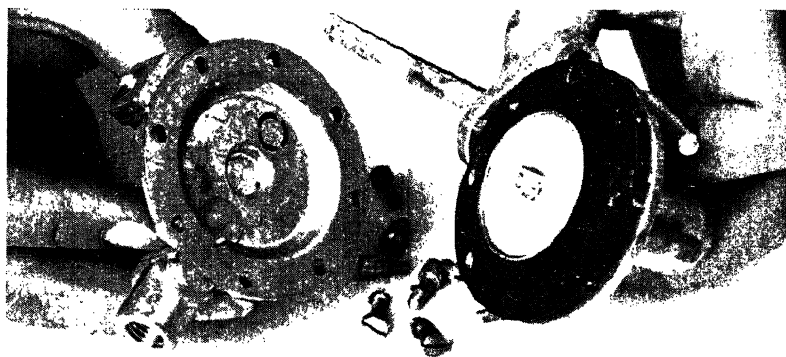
DISMANTLING THE FUEL PUMP (7)
